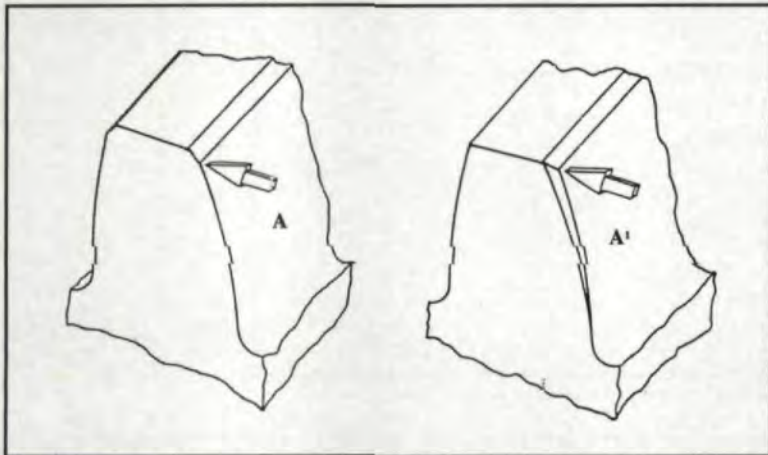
Gear tooth with tip chamfer and tip chamfer along lead and edge chamfer.
